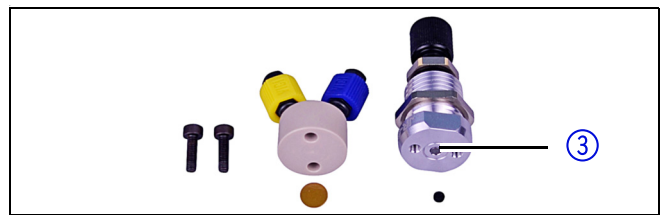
Disassembled Back-Pressure Regulator, stamp inside
